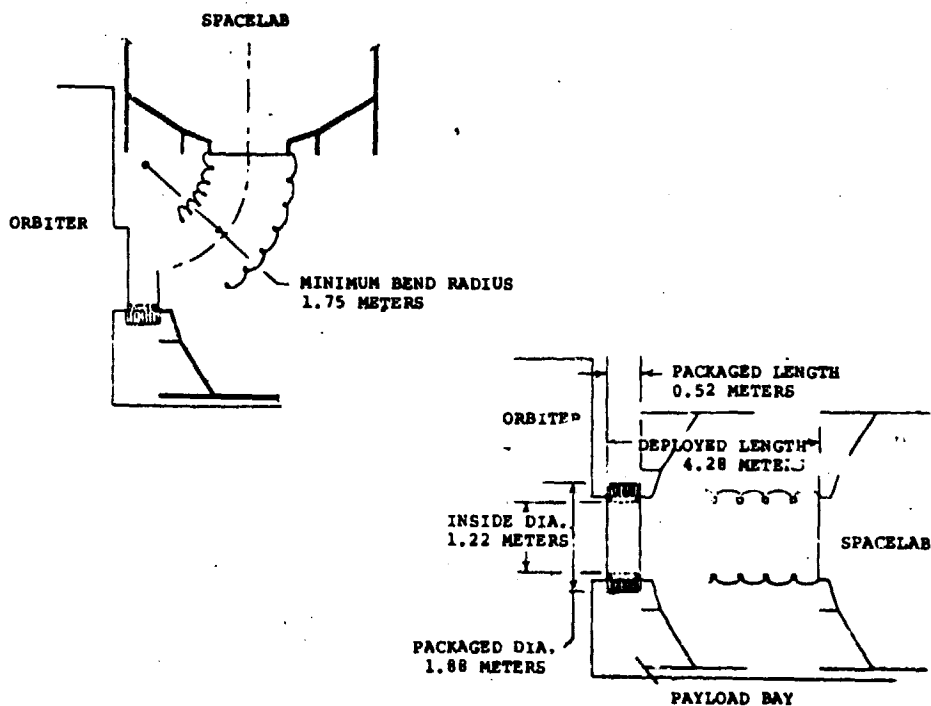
GOODYEAR CONVOLUTED TUBE MODEL DIMENSIONS
